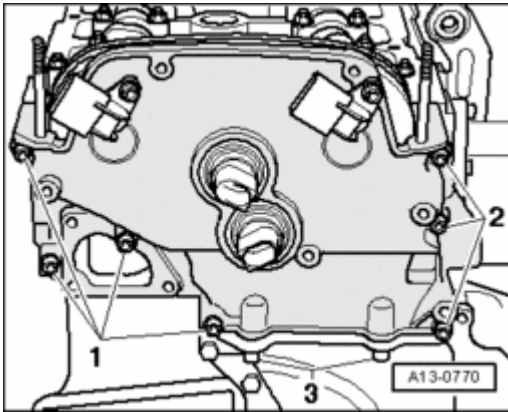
Installing Upper Cover For Camshaft Timing Chain And Tightening Bolts
